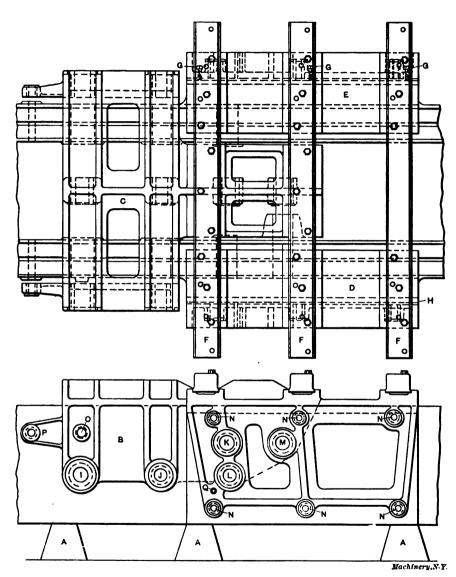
Combination Boring and Drilling Jig in Position on the Bed
